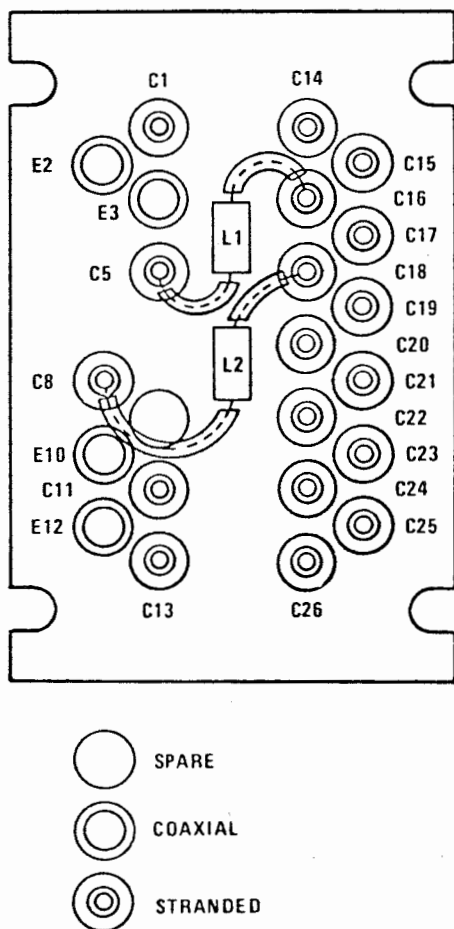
Filter Plate Assembly, A2A7FL1 Component Location
